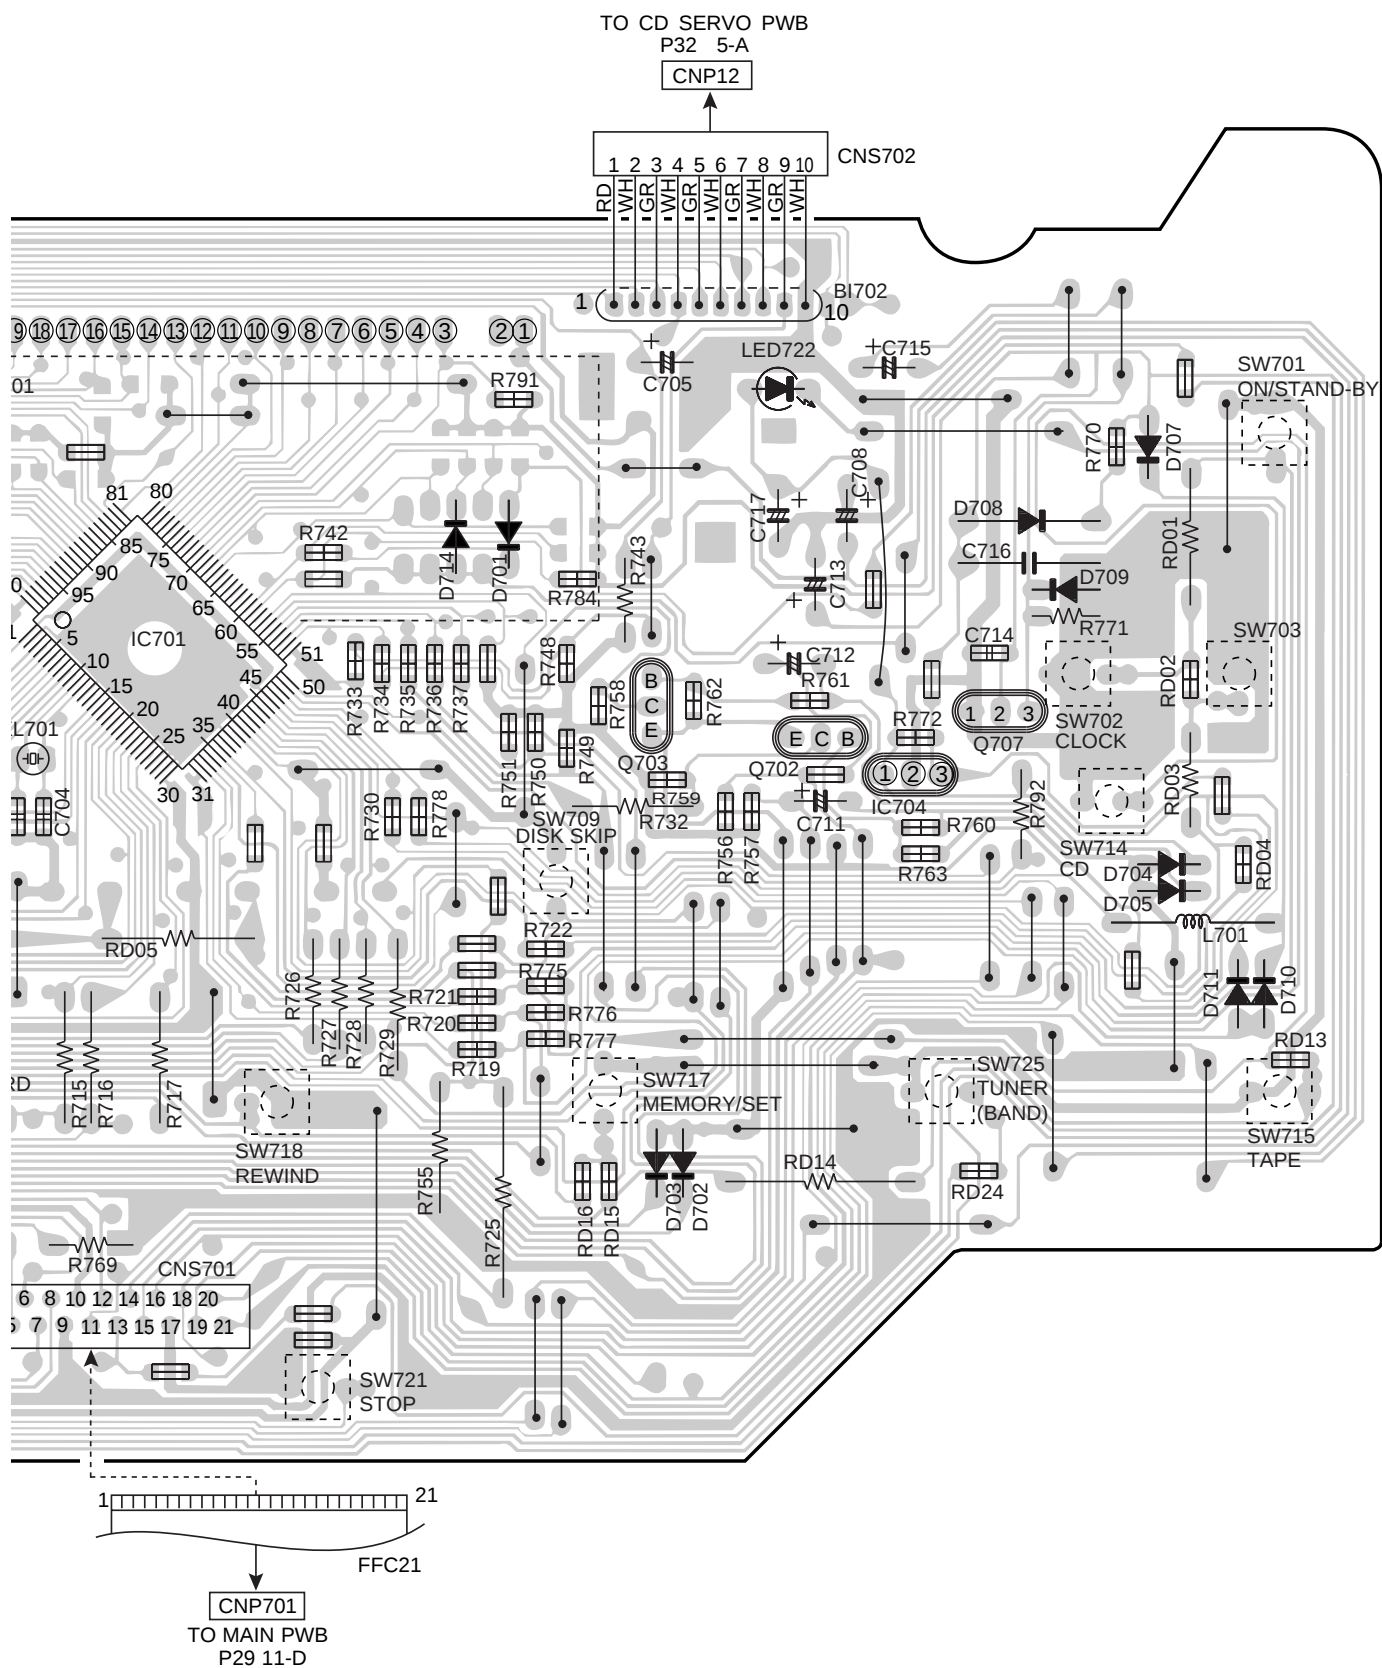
WIRING SIDE OF P.W.BOARD (4/6)
